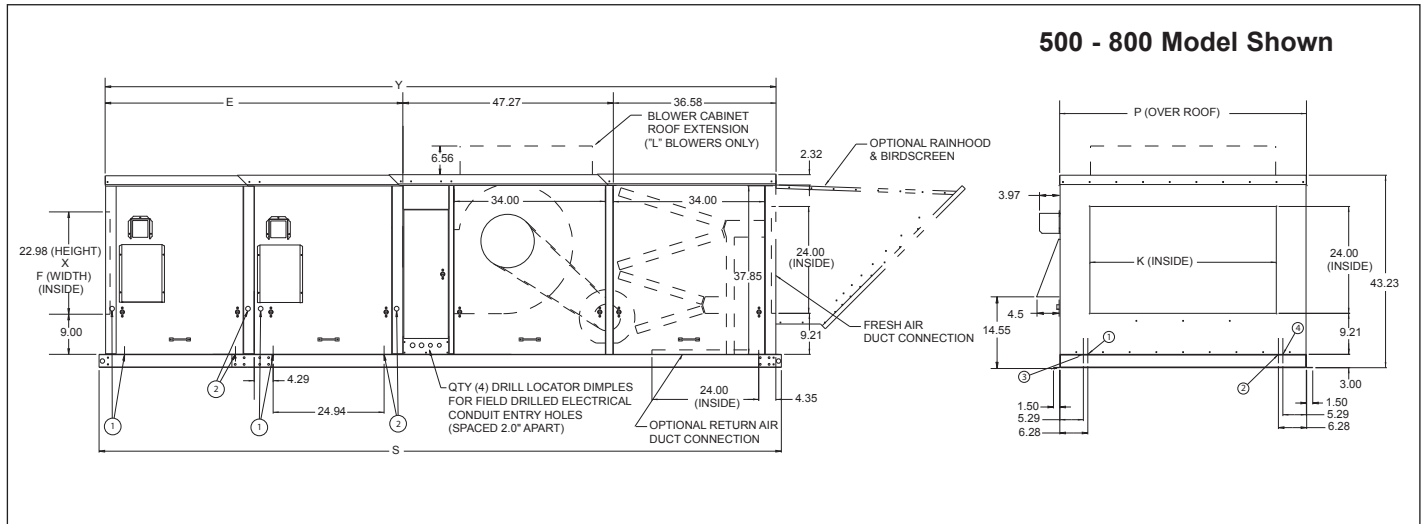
HDP Outdoor EXTENDED Blower Downturn Package Unit Dimensions (Blower Type I, J, K, or L)
